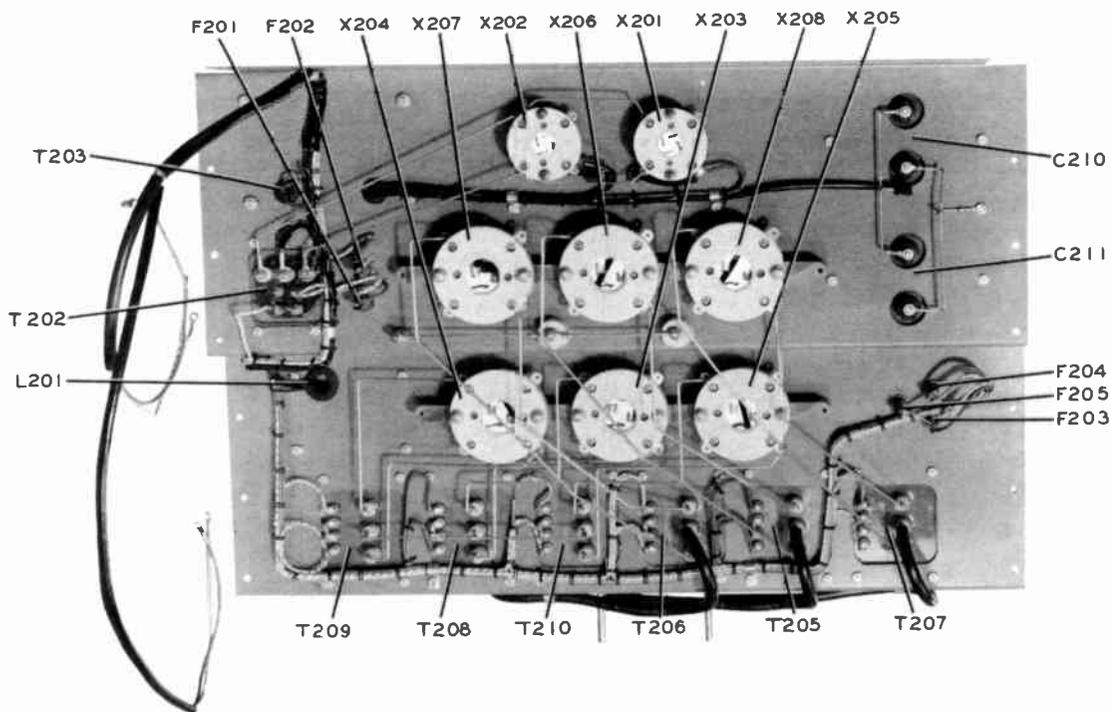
Power Supply Cabinet Rectifier Chassis, Bottom View.
